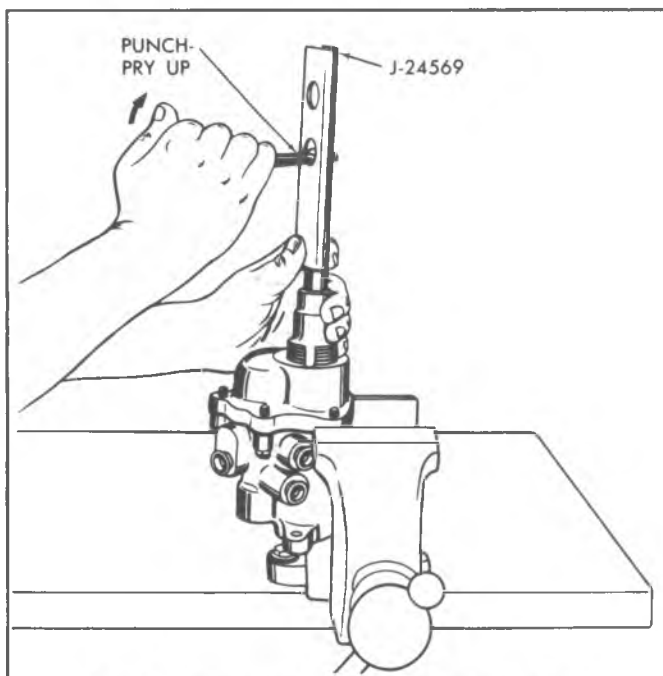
E--Removing Booster Pedal Rod (Typical)
